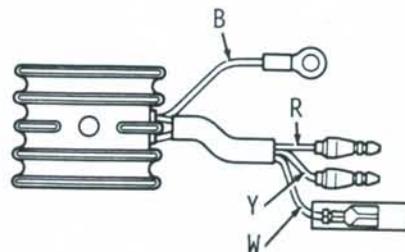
View of rectifier assembly. Refer to chart in Fig. SZ11-51 to test rectifier.
